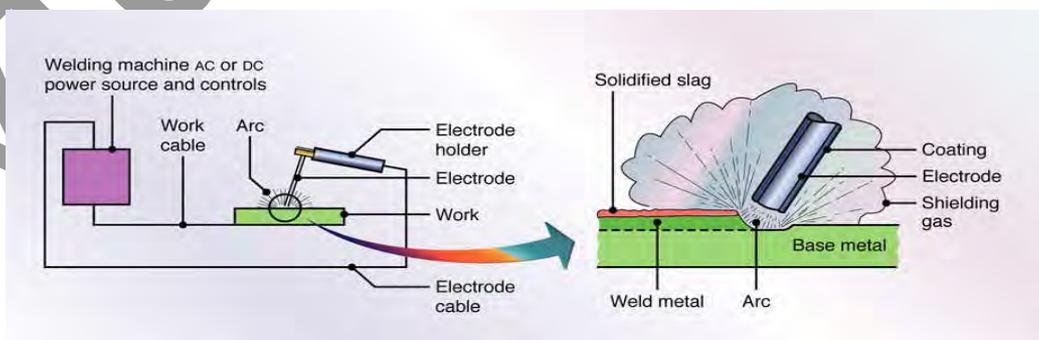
Schematic illustration of shielded metal arc welding
